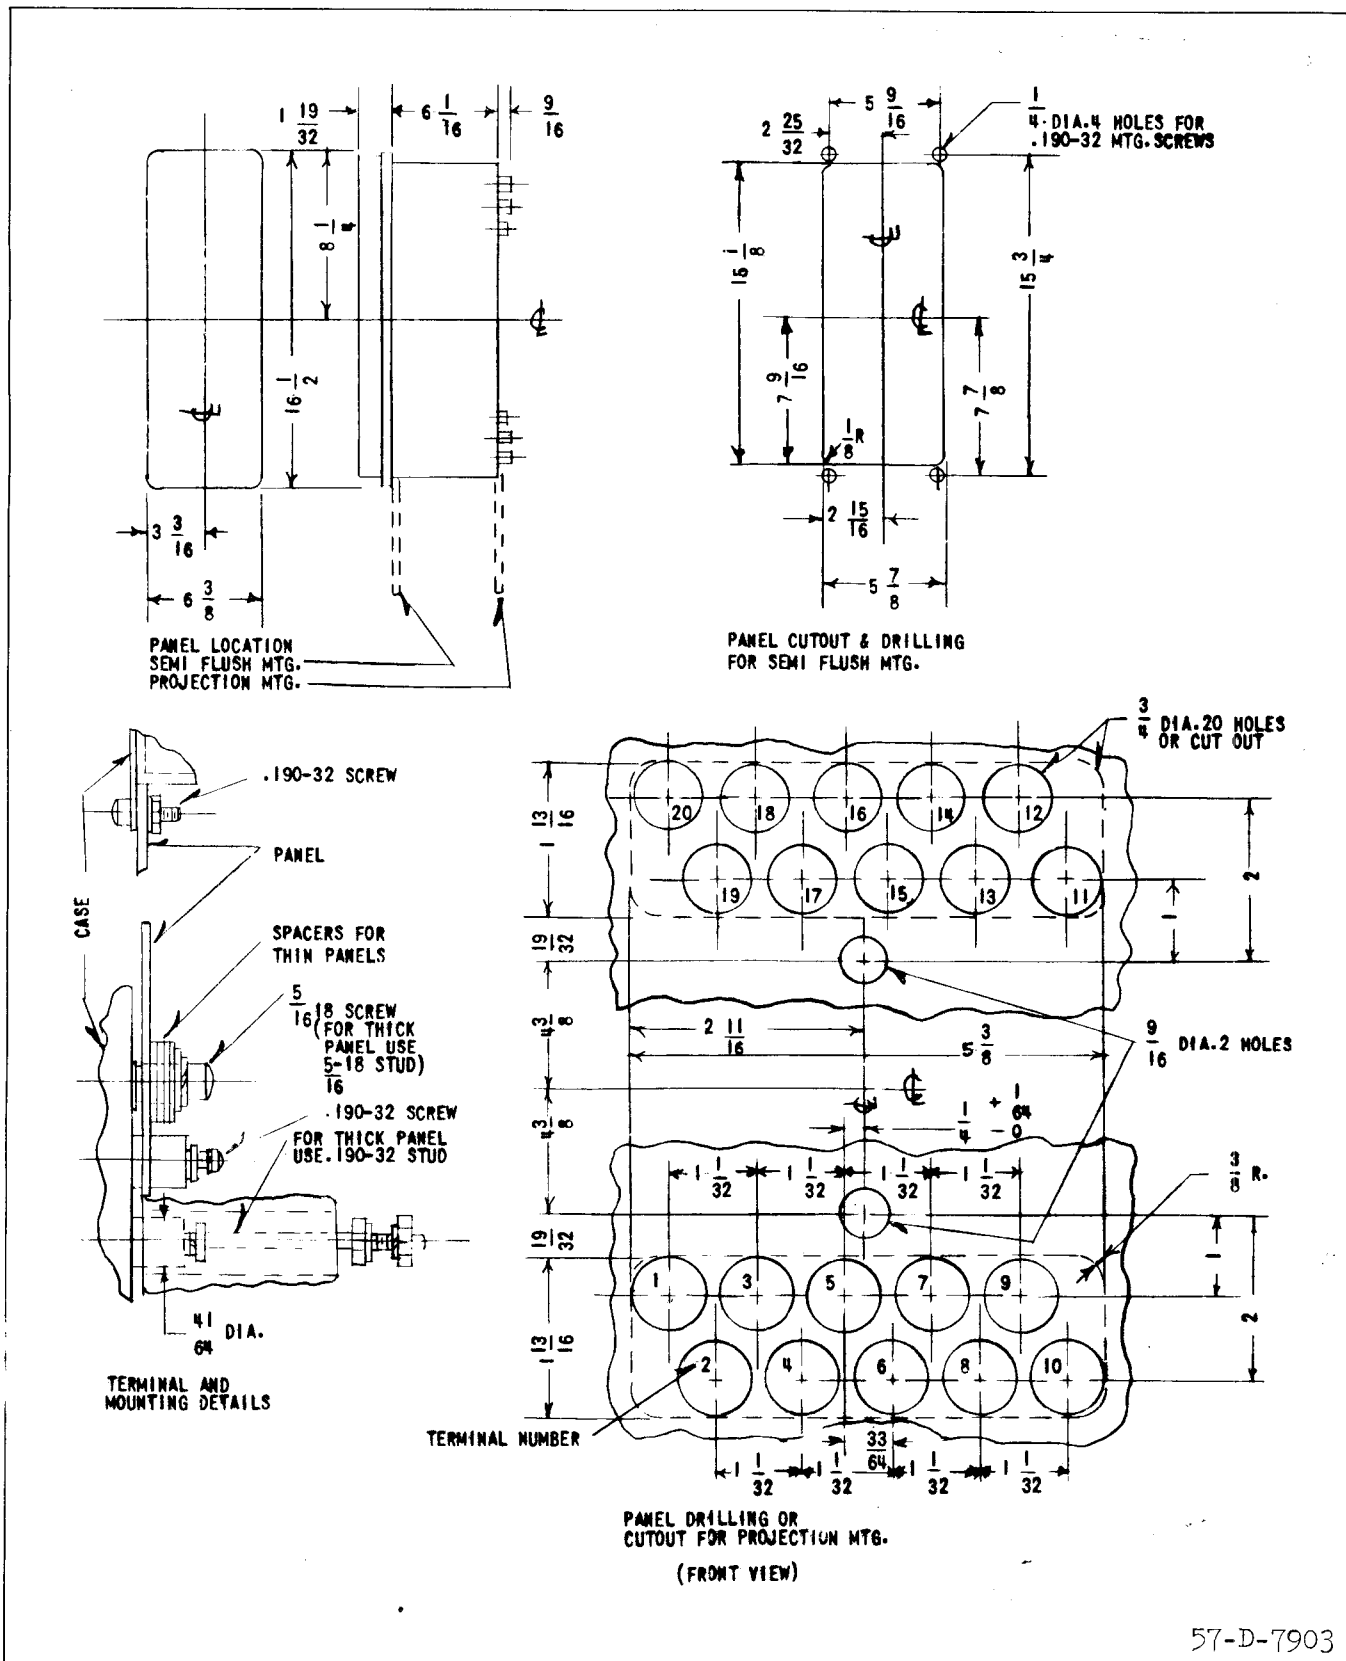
Outline and Drilling Plan for the Type FT32 Case
